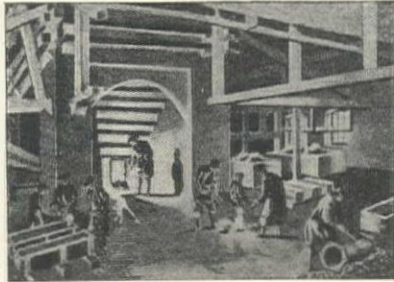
Casting Pipe on the Bank in 3 or 4-ft. Lengths, 1800
